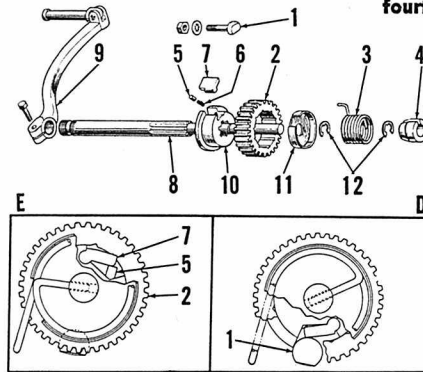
Exploded view of kick-starter assembly. View "E" shows pawl (7) engaged when starting. When disengaged as shown in view "D", the pawl is retracted by contacting stop (1).
